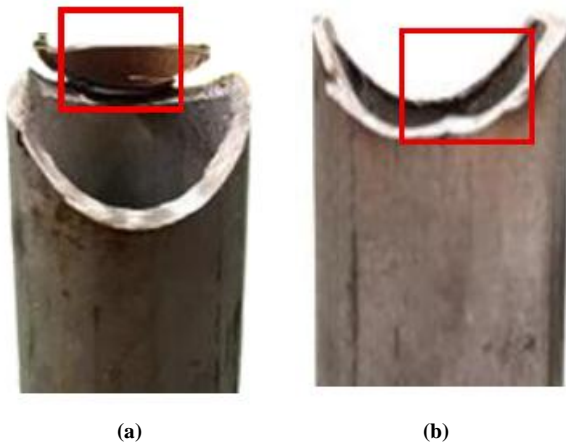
Incompletely cut product (a) and product with out-of-standard profile (b)
